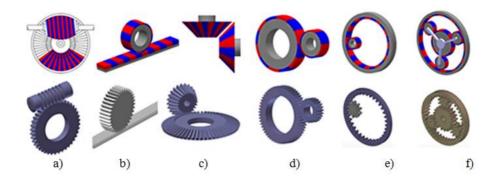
Comparative display of magnetic and mechanical gears: a) worm gear, b) rack and pinion gear, c) bevel gear, d) external spur gear, e) internal spur gear, f) planetary gear [1]
